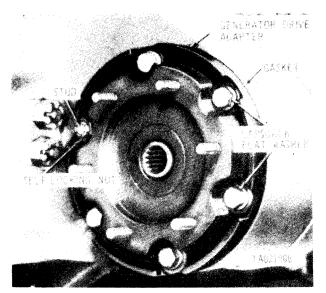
Removing or installing generator drive adapter model AVDS-1790-2D and AVDS-1790-2DR engines.
